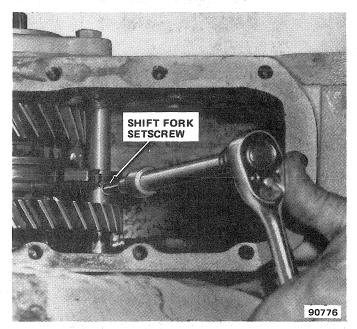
D-78 Shift Fork Setscrew Removal/Installation
